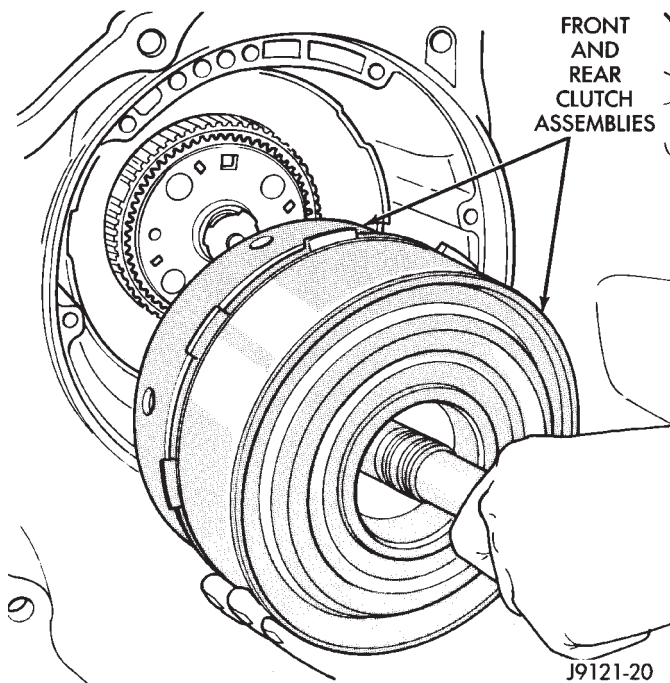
Installing Front/Rear Clutch Assemblies (46RH)
